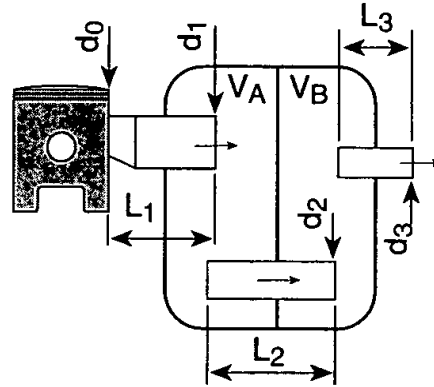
Dimensions of a chainsaw exhaust system.
